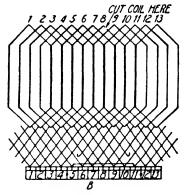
Correct Method of Connecting a Jumper in a Single-Series Winding
